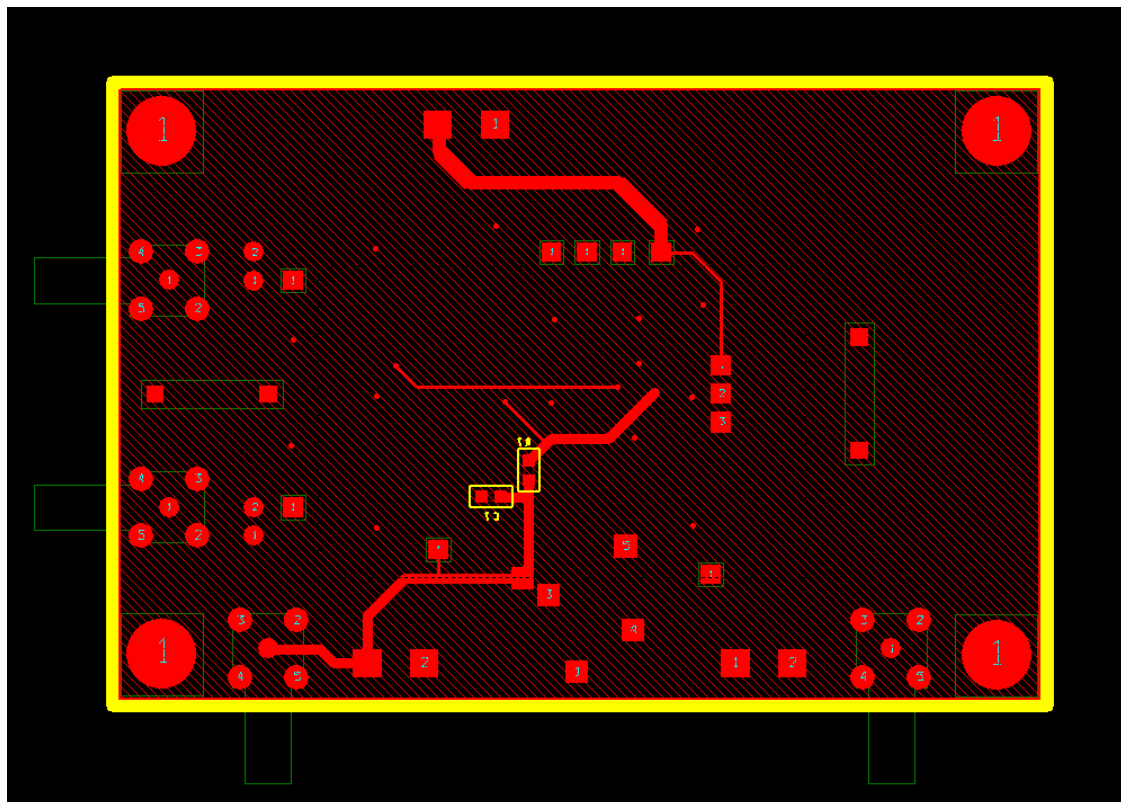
NCP2811ADTBGEVB Board Layout (Bottom View)
